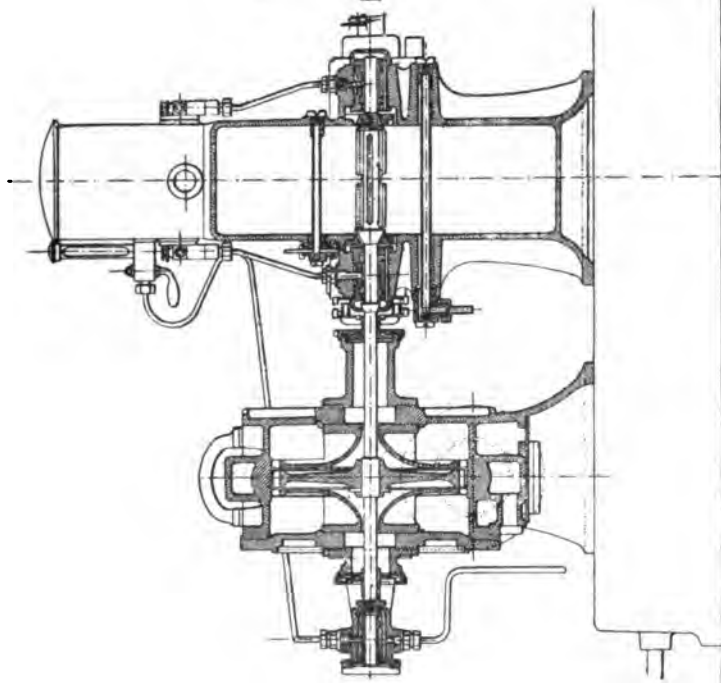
De Laval Turbine Wheel, Separator type, with Nozzle and Footstep Bearing.
